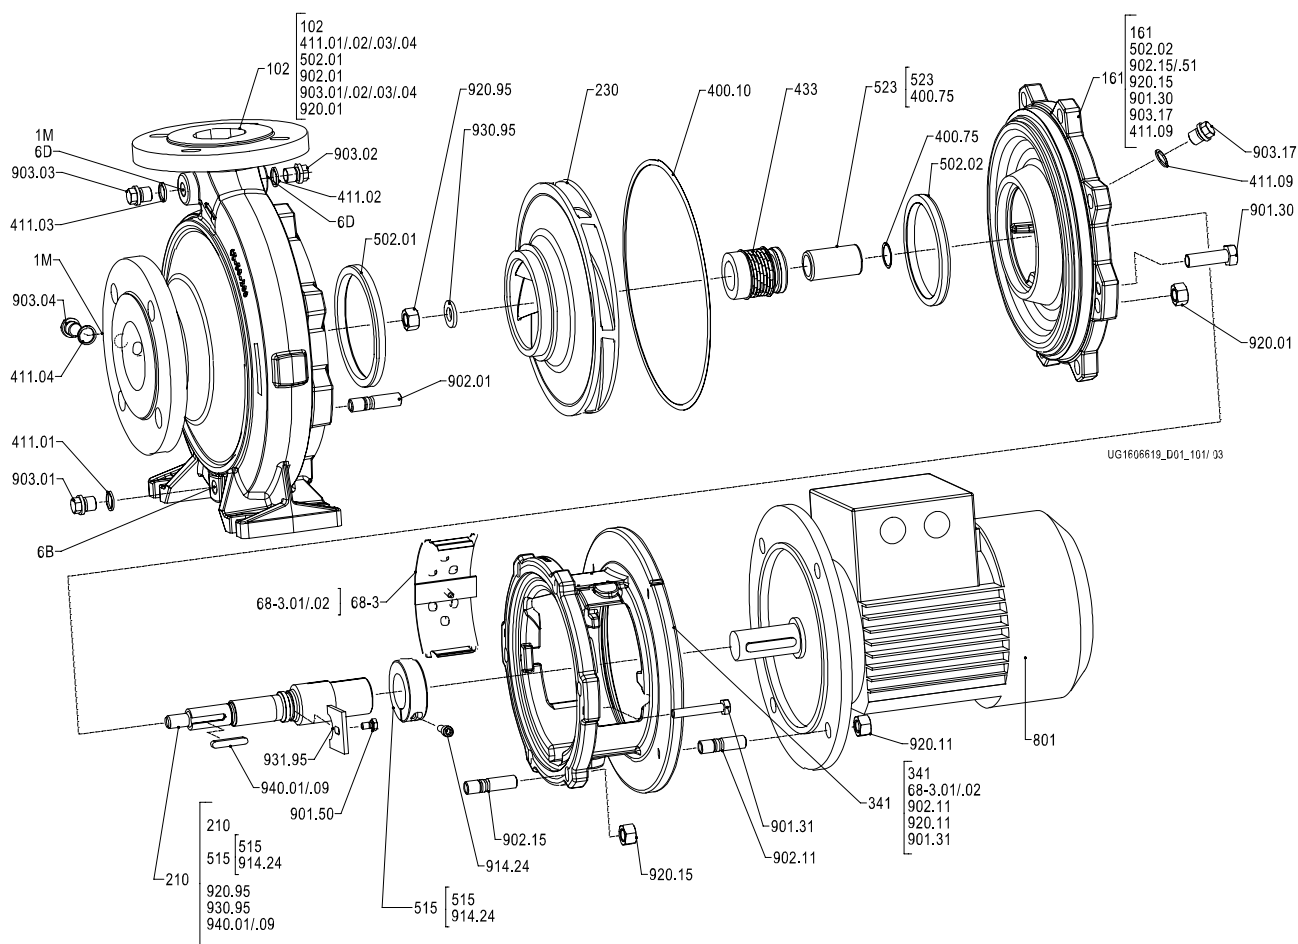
Version with single mechanical seal and bolted casing cover, with pump foot
